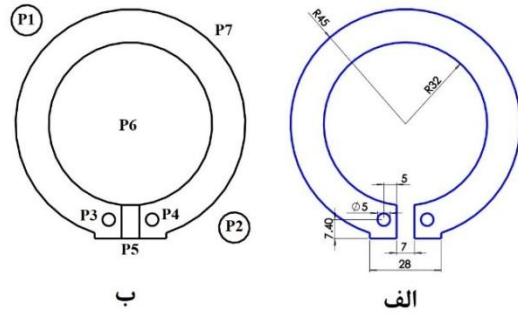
a) Sheet metal workpiece of example 3 b) Operating punches for example 3
